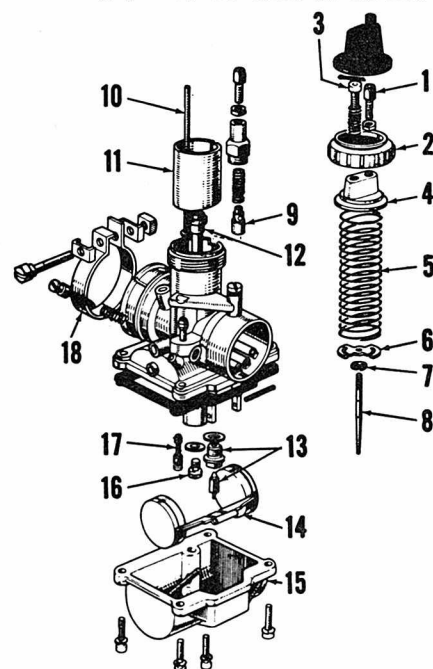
Exploded view of Mikuni sliding valve carburetor used on the Mach III.
